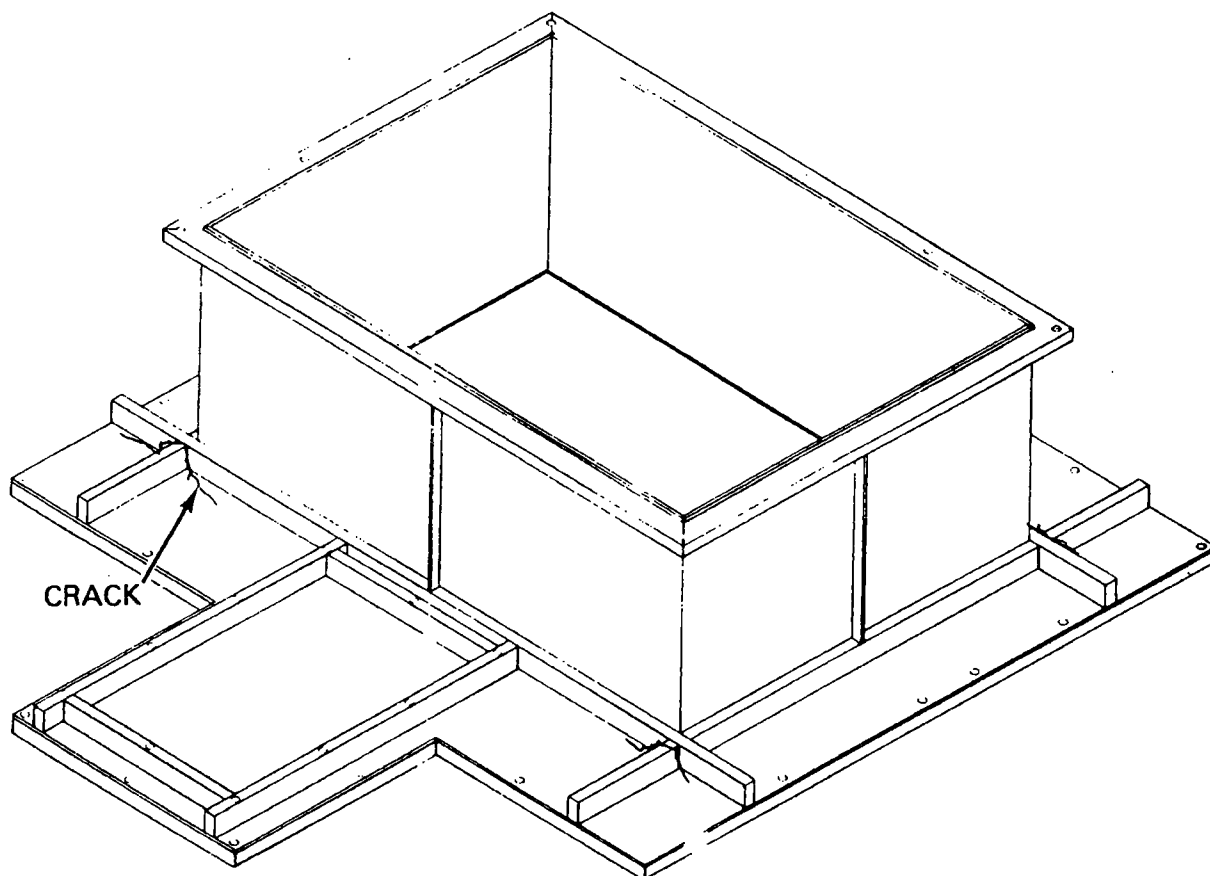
Melter Lid Indicating Position of Strongback Weld Cracks
